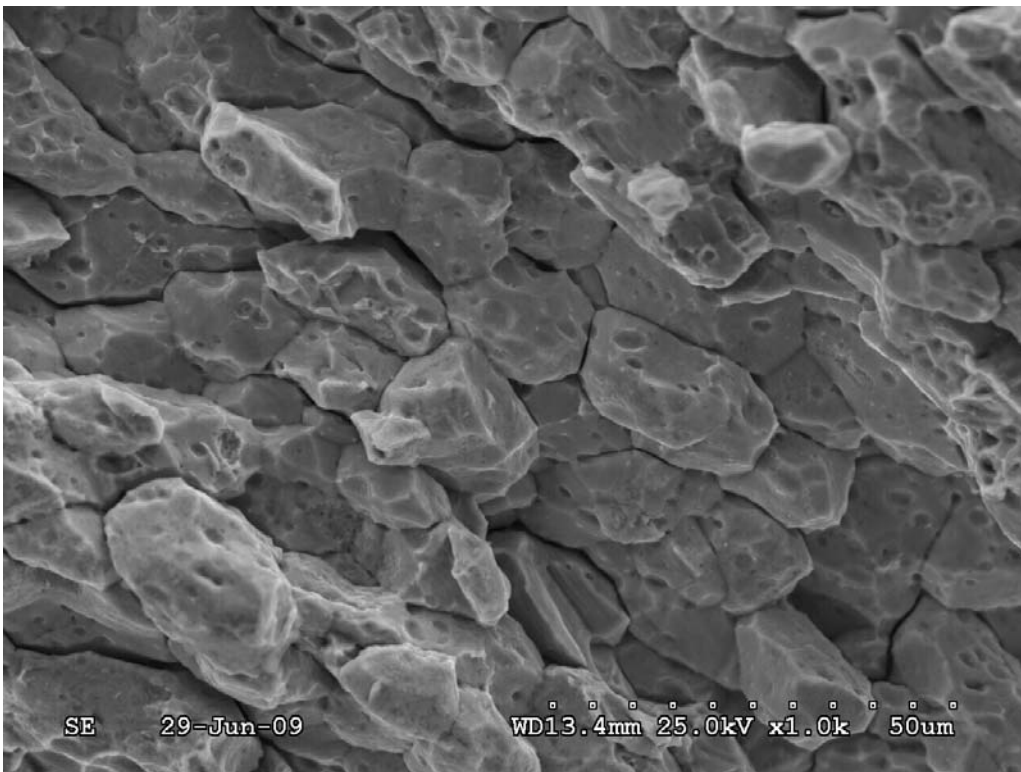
SEM image of fracture surface of October failure showing intergranular fracture.
